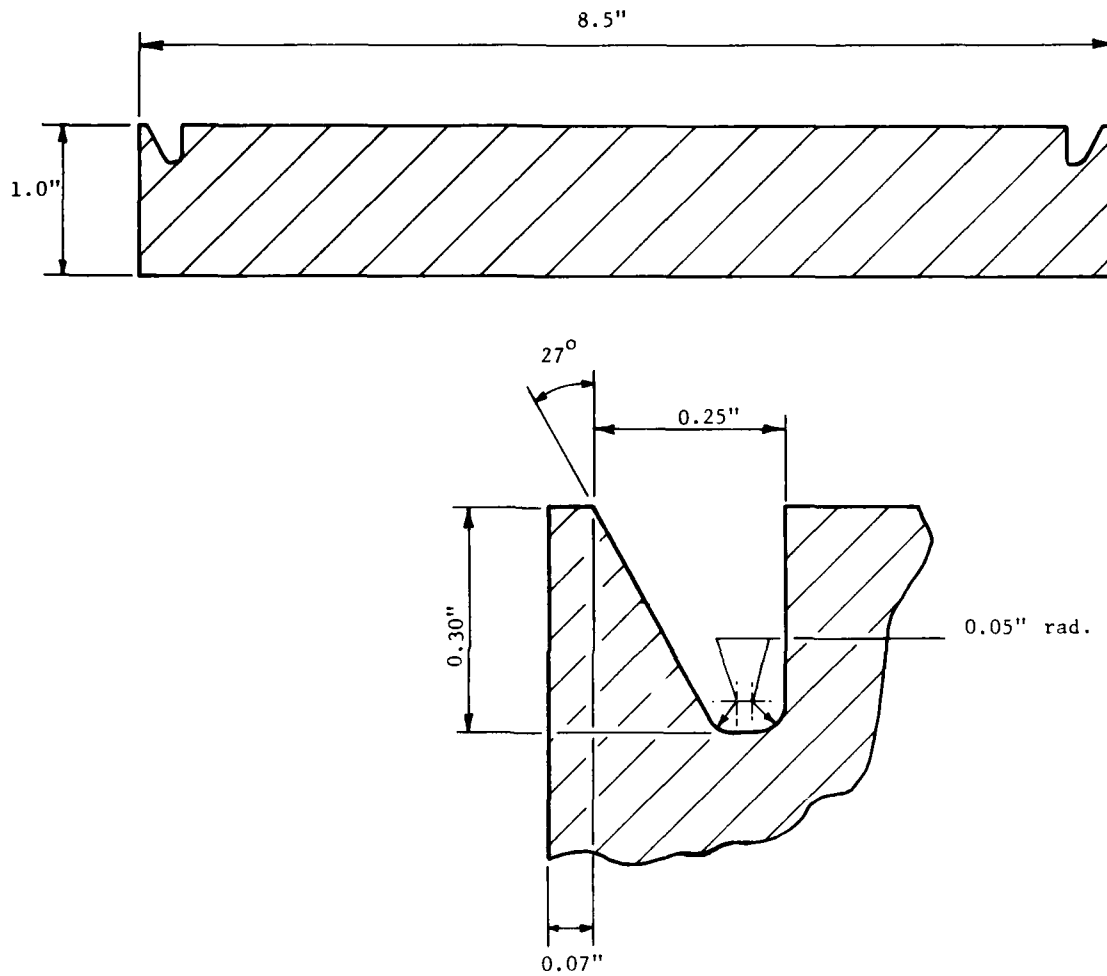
Machined disc of incendiary composition for peripheral-burning device
